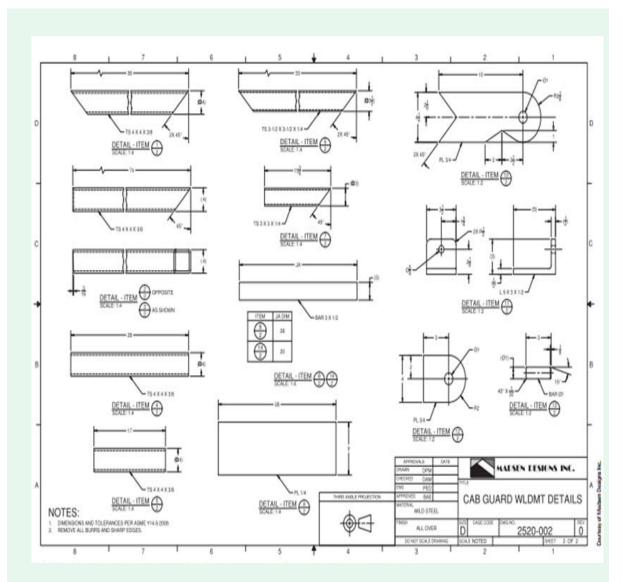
Example of a multidetail drawing with several detail drawings on one sheet
